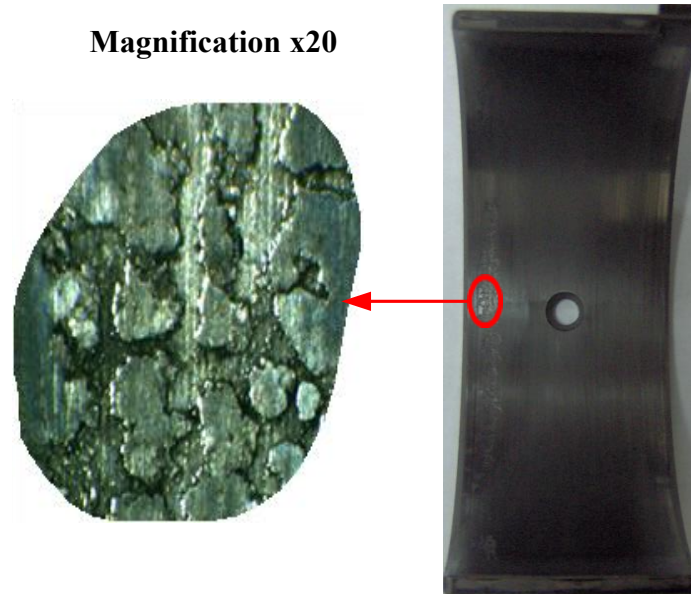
Conventional high performance bearing (a competitor bearing similar to King C 697) after King rig test (9500 psi, 4,300,000 cycles)
